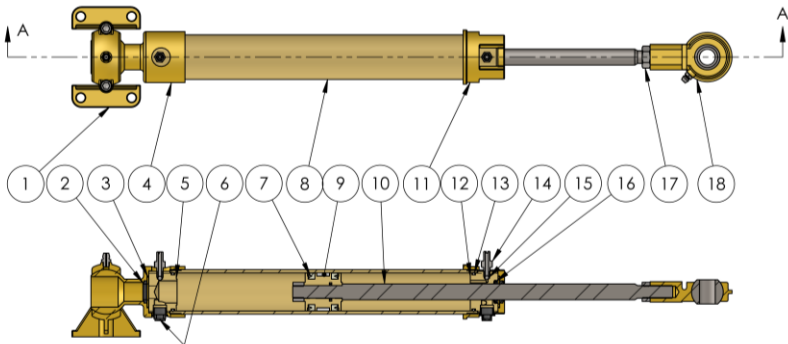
7040,7050 Unbalance Cylinder Parts Diagram
